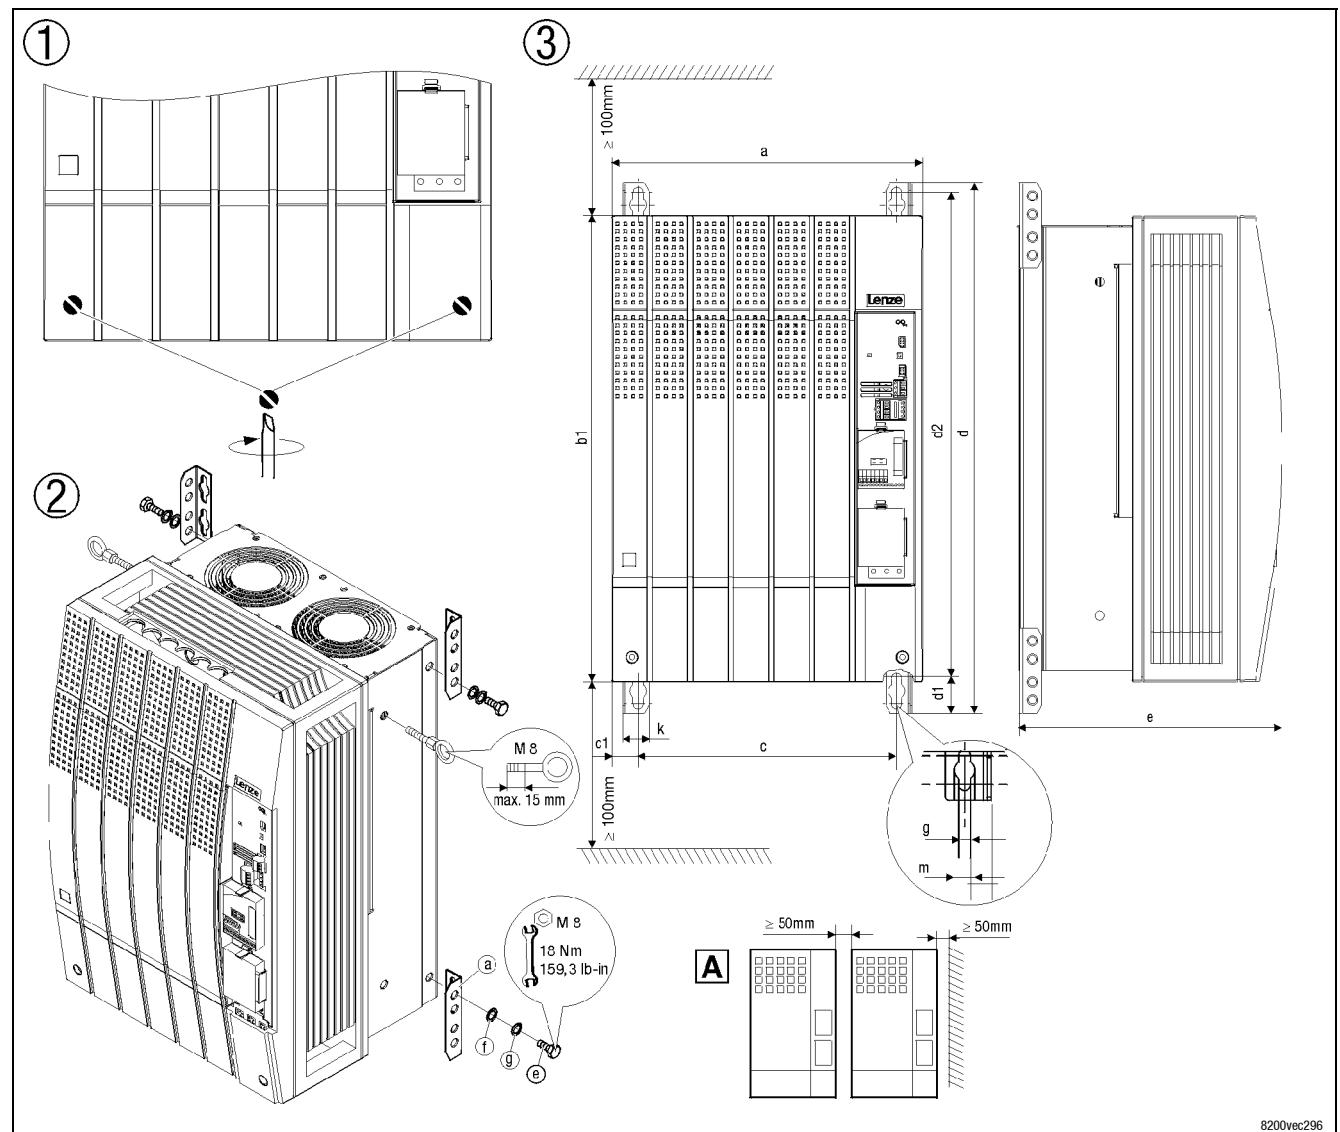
Standard mounting with mains choke 45 ... 55 kW
